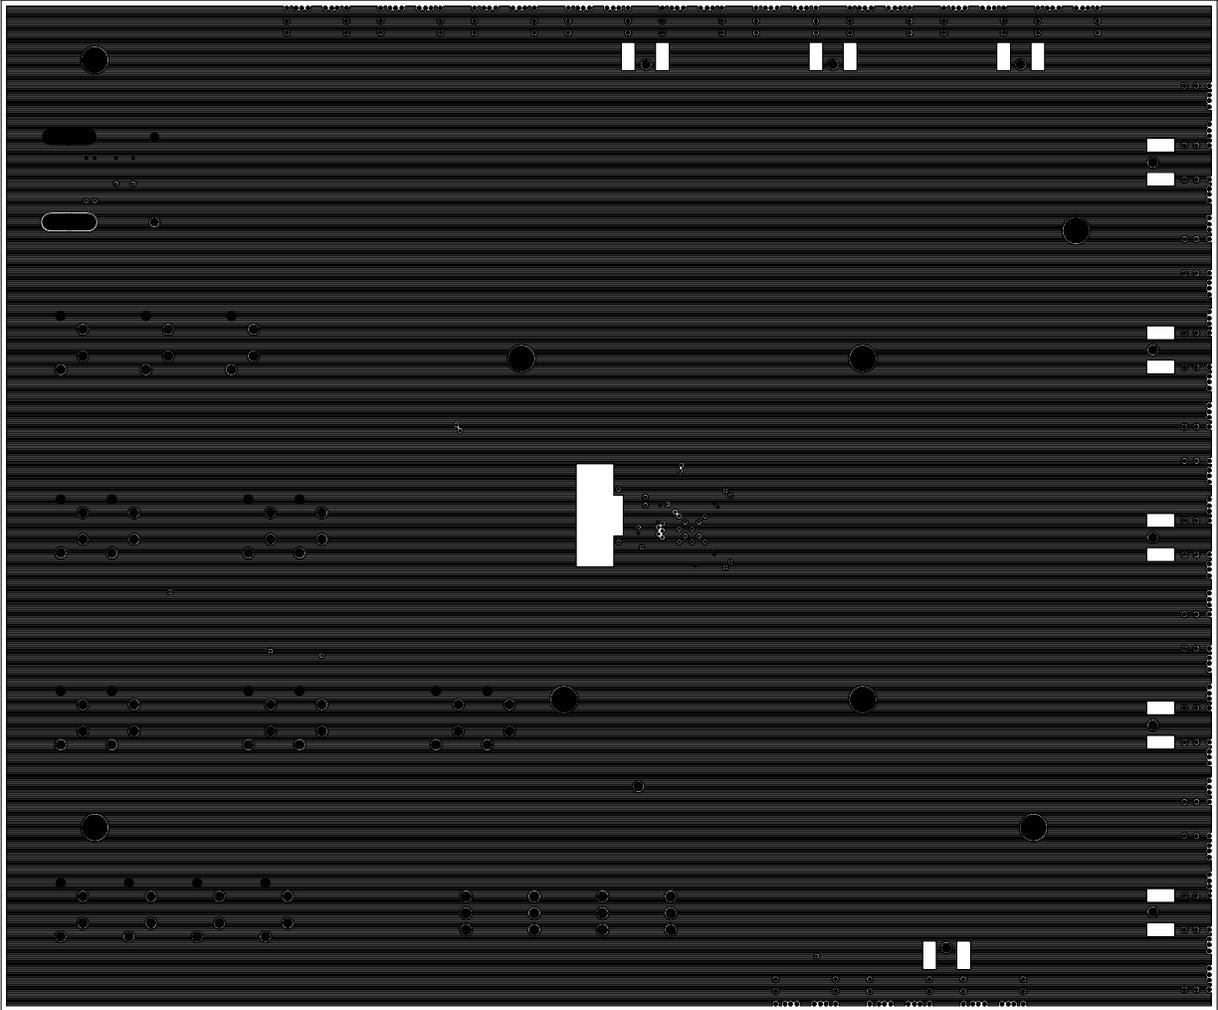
MAX3639 EV Kit PCB Layout—Power Plane
